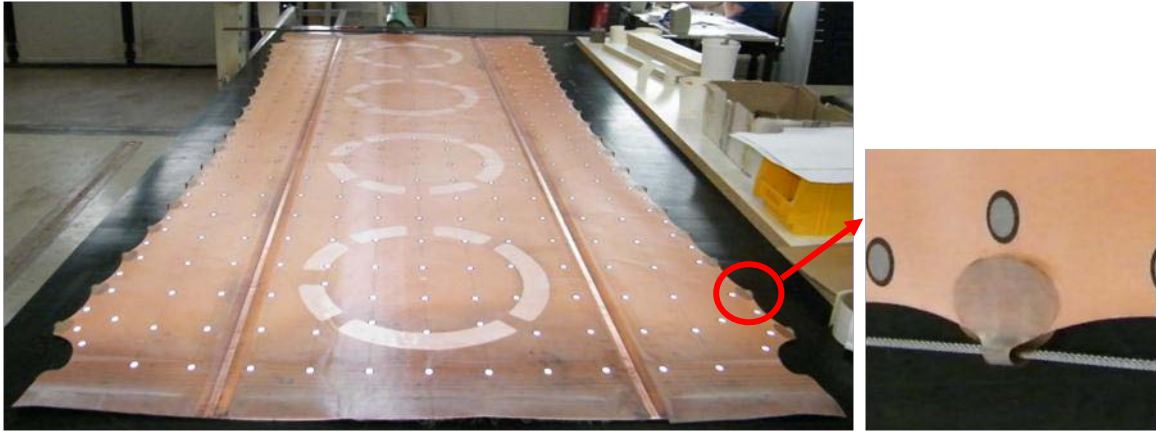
membrane laminate assembly, right: tensioning cable attachment
